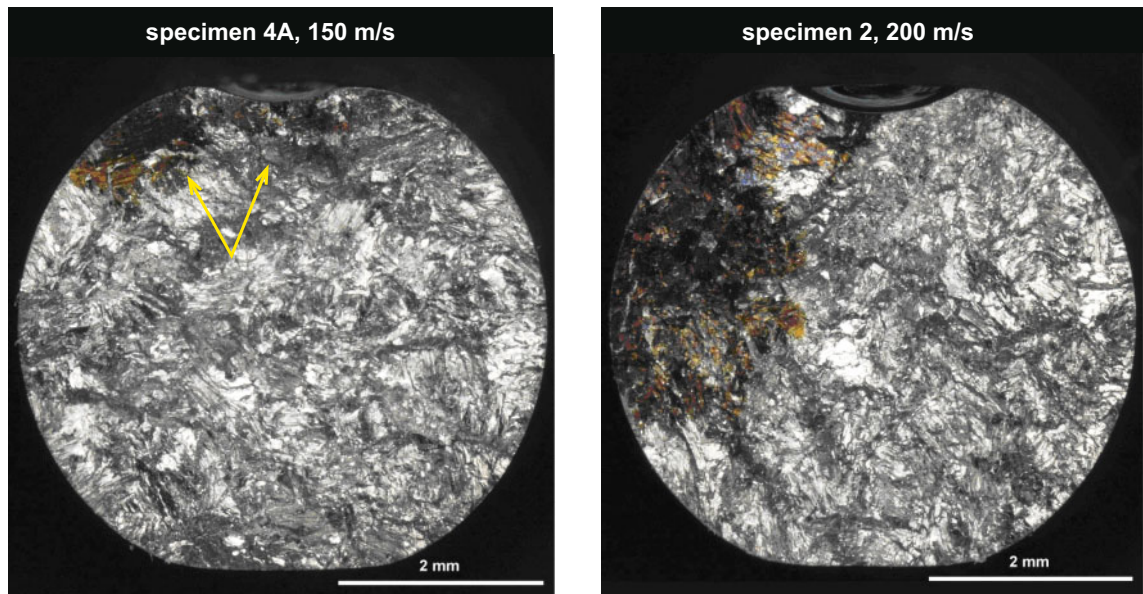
Examples of FOD-induced heat-tinted cracks after specimen HCF failure
